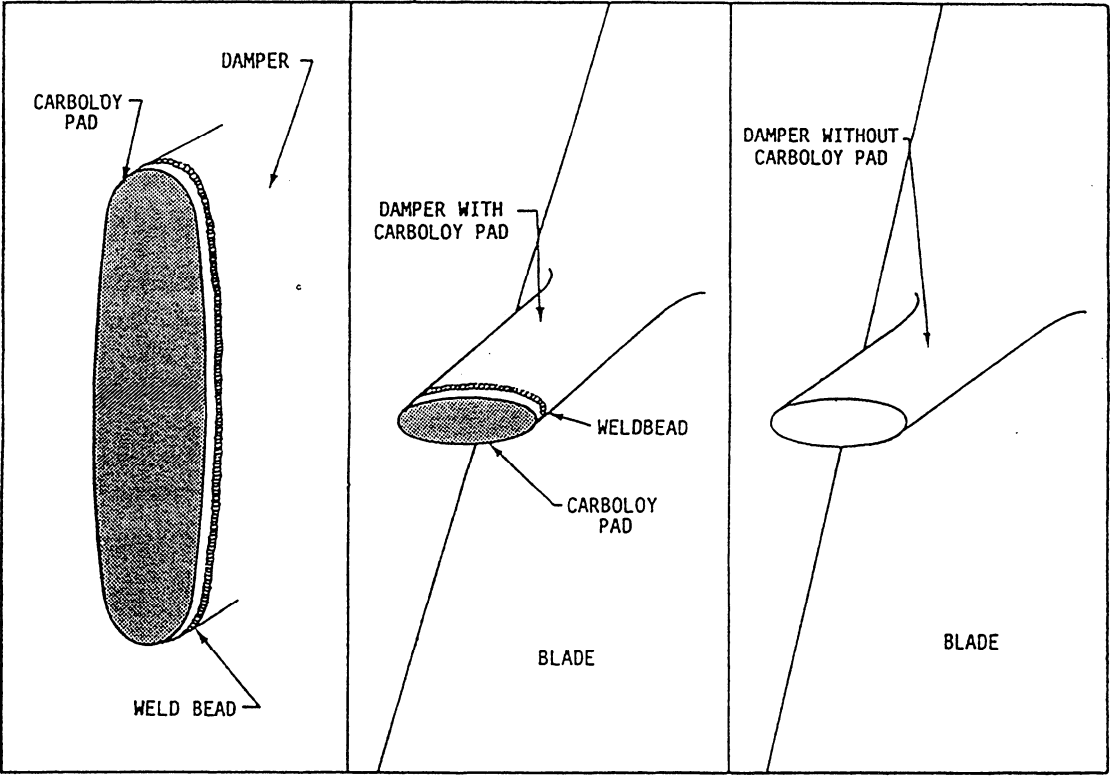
Compressor blade midspan damper carboLOY pad.
